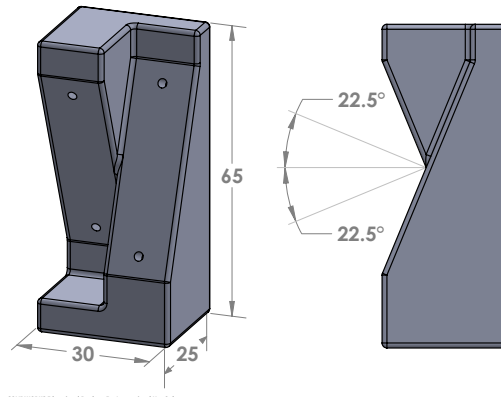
CAD model of Prototype 1 with dimensions [mm]
